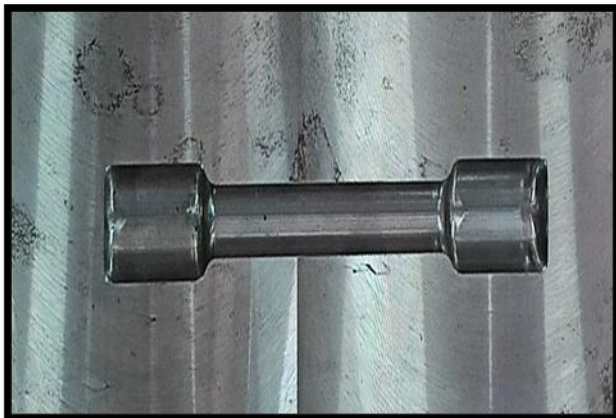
Tension Specimen Mould According to ASTM E-8 Standards.
